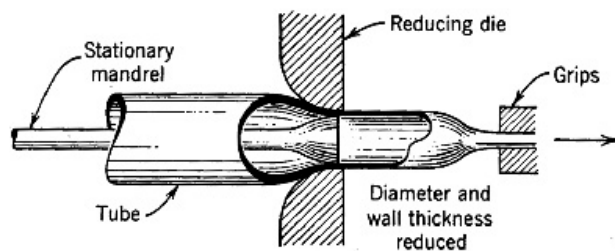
Tube drawing over fixed mandrel (Source: www.copper.org)
